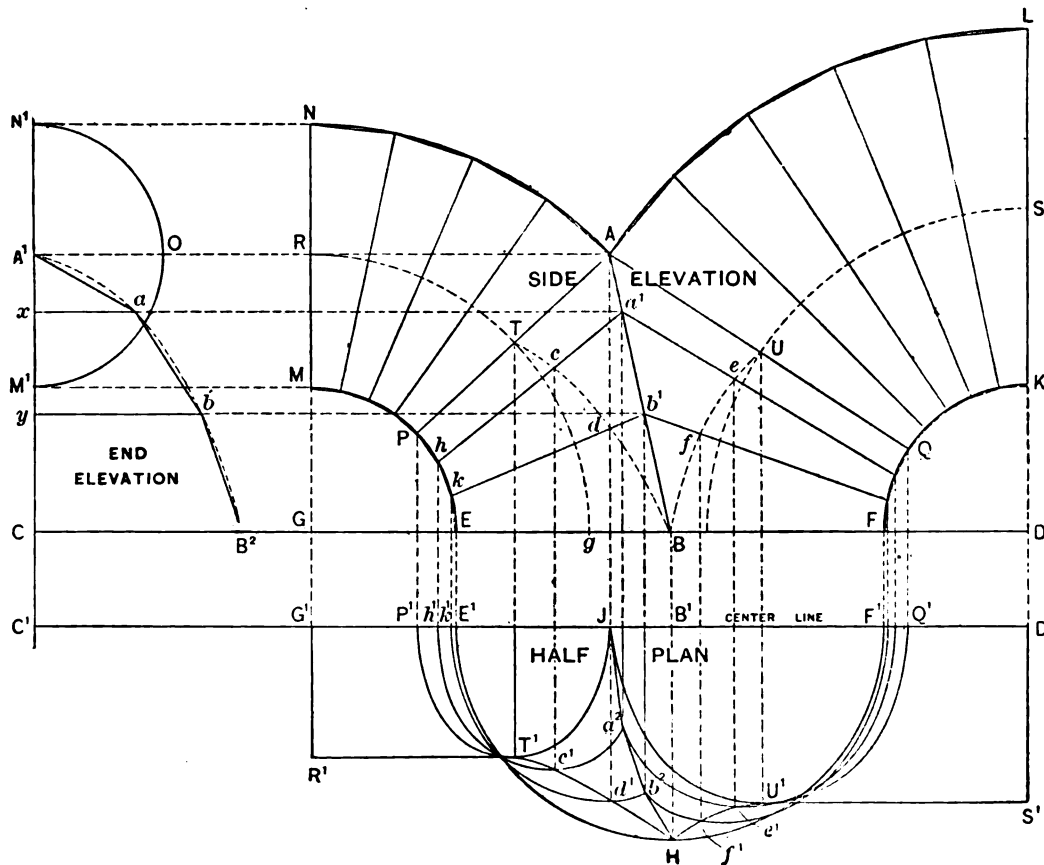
Complete Drawings of Double Elbow shown in Fig. 87.—One-eighth Full Size
